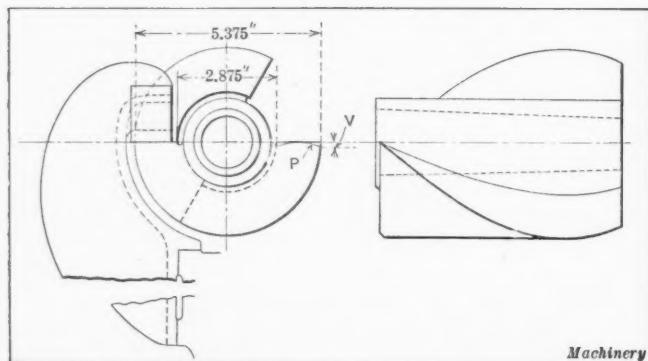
End and Side Elevation of a Guide for machining Helical Surfaces
